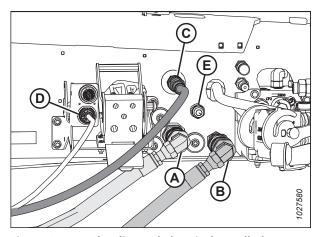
Hydraulics and Electrical Installed – Auger/Rotary/Draper-Ready Windrower
